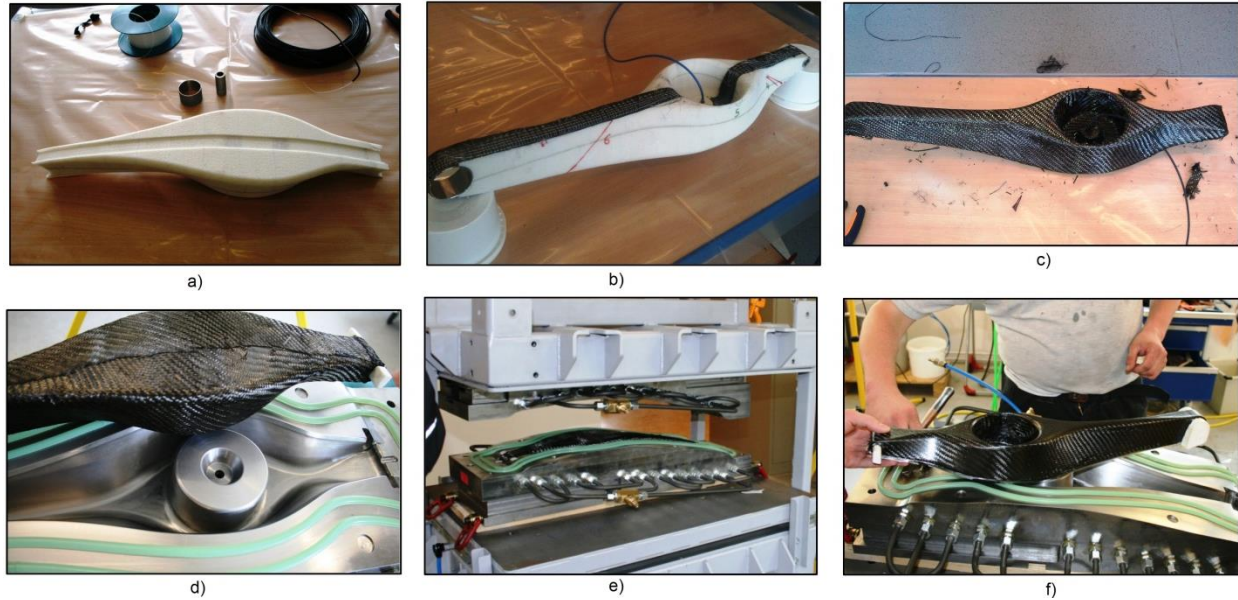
Overview of the RTM control arm production steps a) machined PET foam core. b) UD reinforcing layers and end-bushings placement c) preform d) preform insertion in the mould e) mould closure f) demoulding after production.
